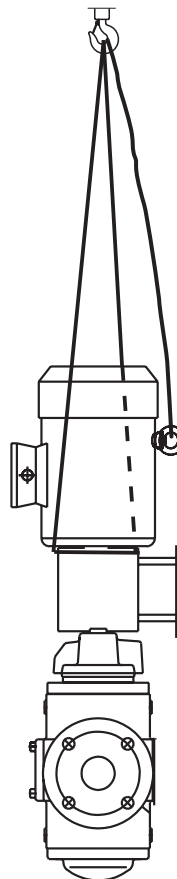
Fastening the lifting gear to the pump unit vertically (as illustrated)
